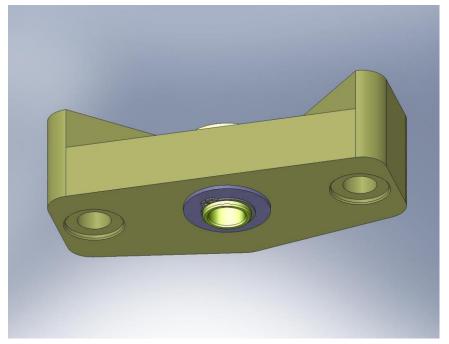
The retaining ring and Offset Washer prevent the Conversion Bushing from sliding out of the bearing.
